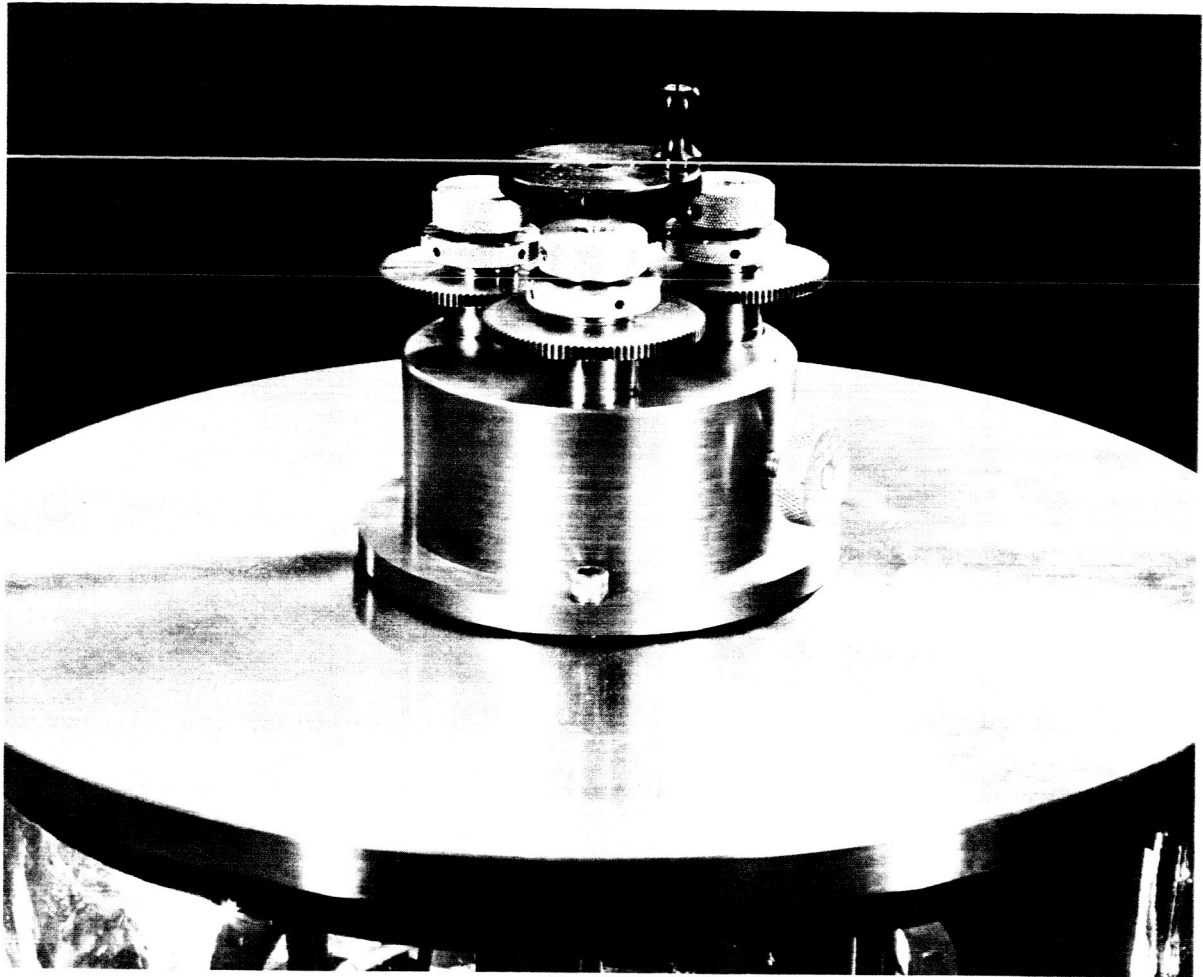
TEST VEHICLE DRIVE MECHANISM
